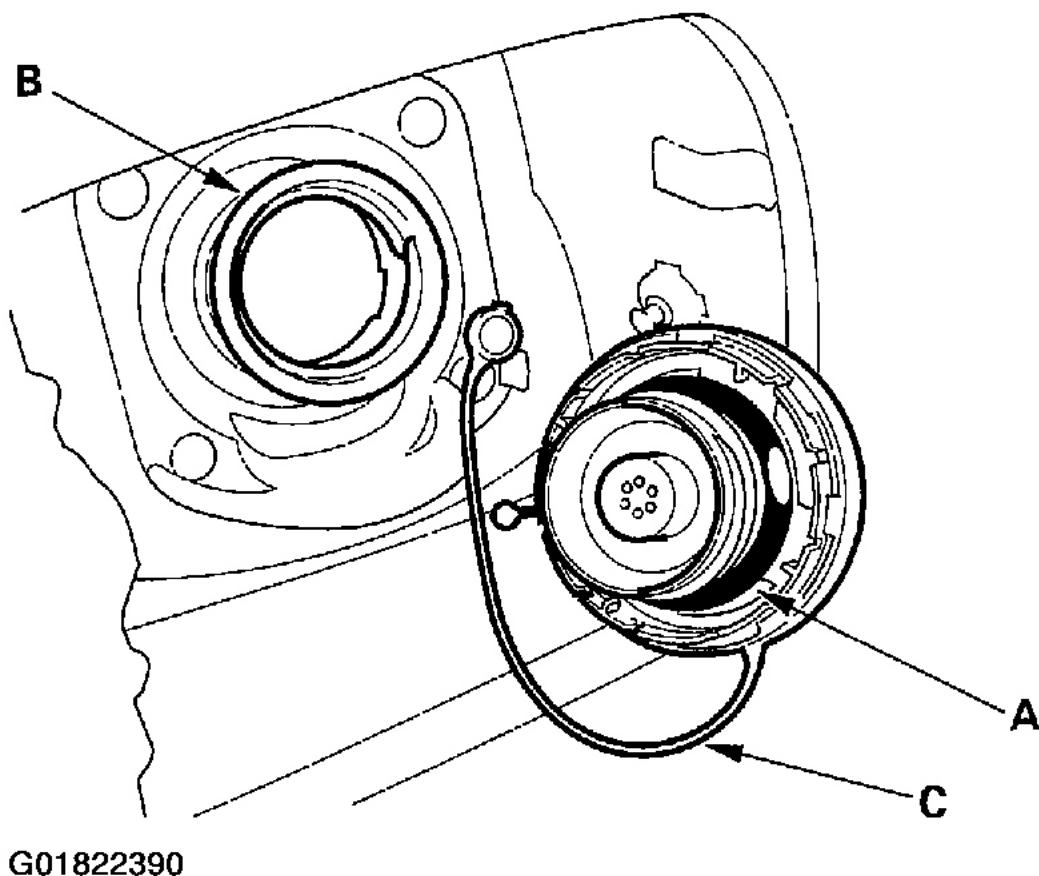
Checking The Fuel Fill Cap Seal & The Fuel Fill Pipe Mating Surface
